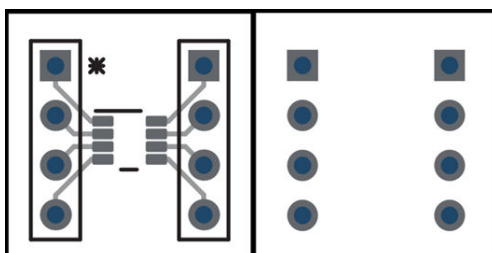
DSG package top layer (left) and bottom layer (right) PCB layout
